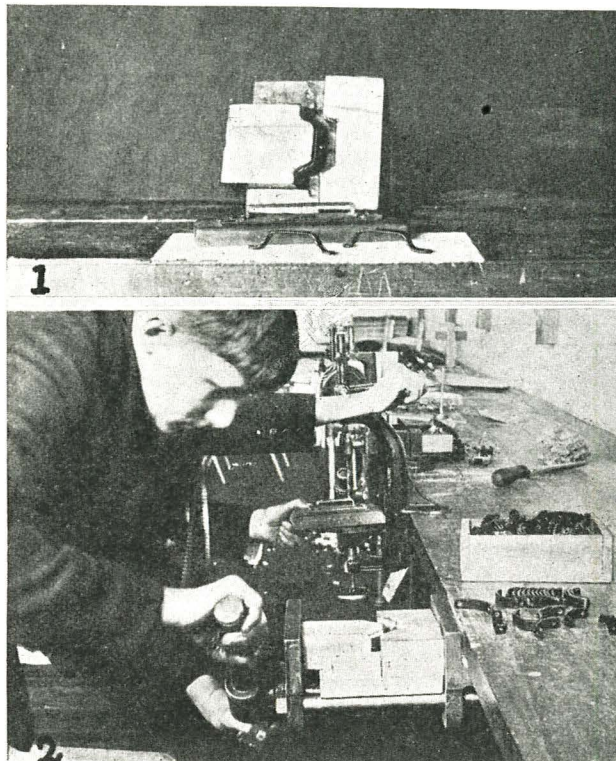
(above) Bending Fixture. Fig. 2. The Fixture in Use.
